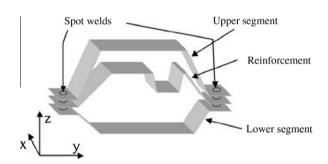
Thin-walled cross section of BIW structure using pressed sheet metal.
